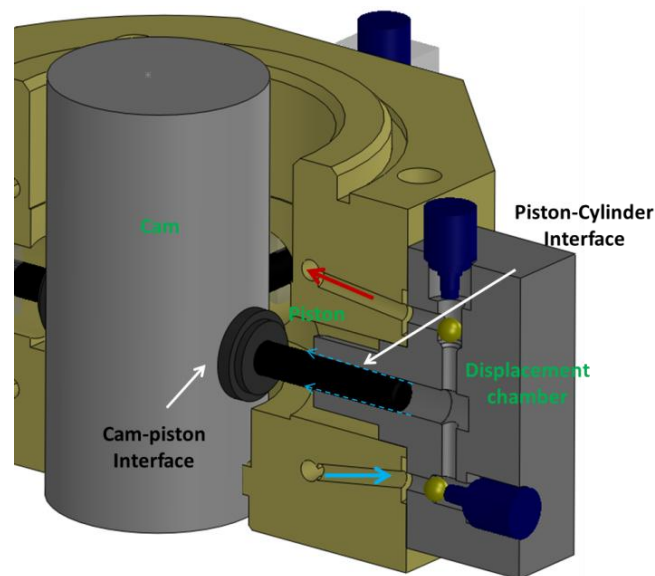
Lubricating gaps in a rotating cam type radial piston pump.
